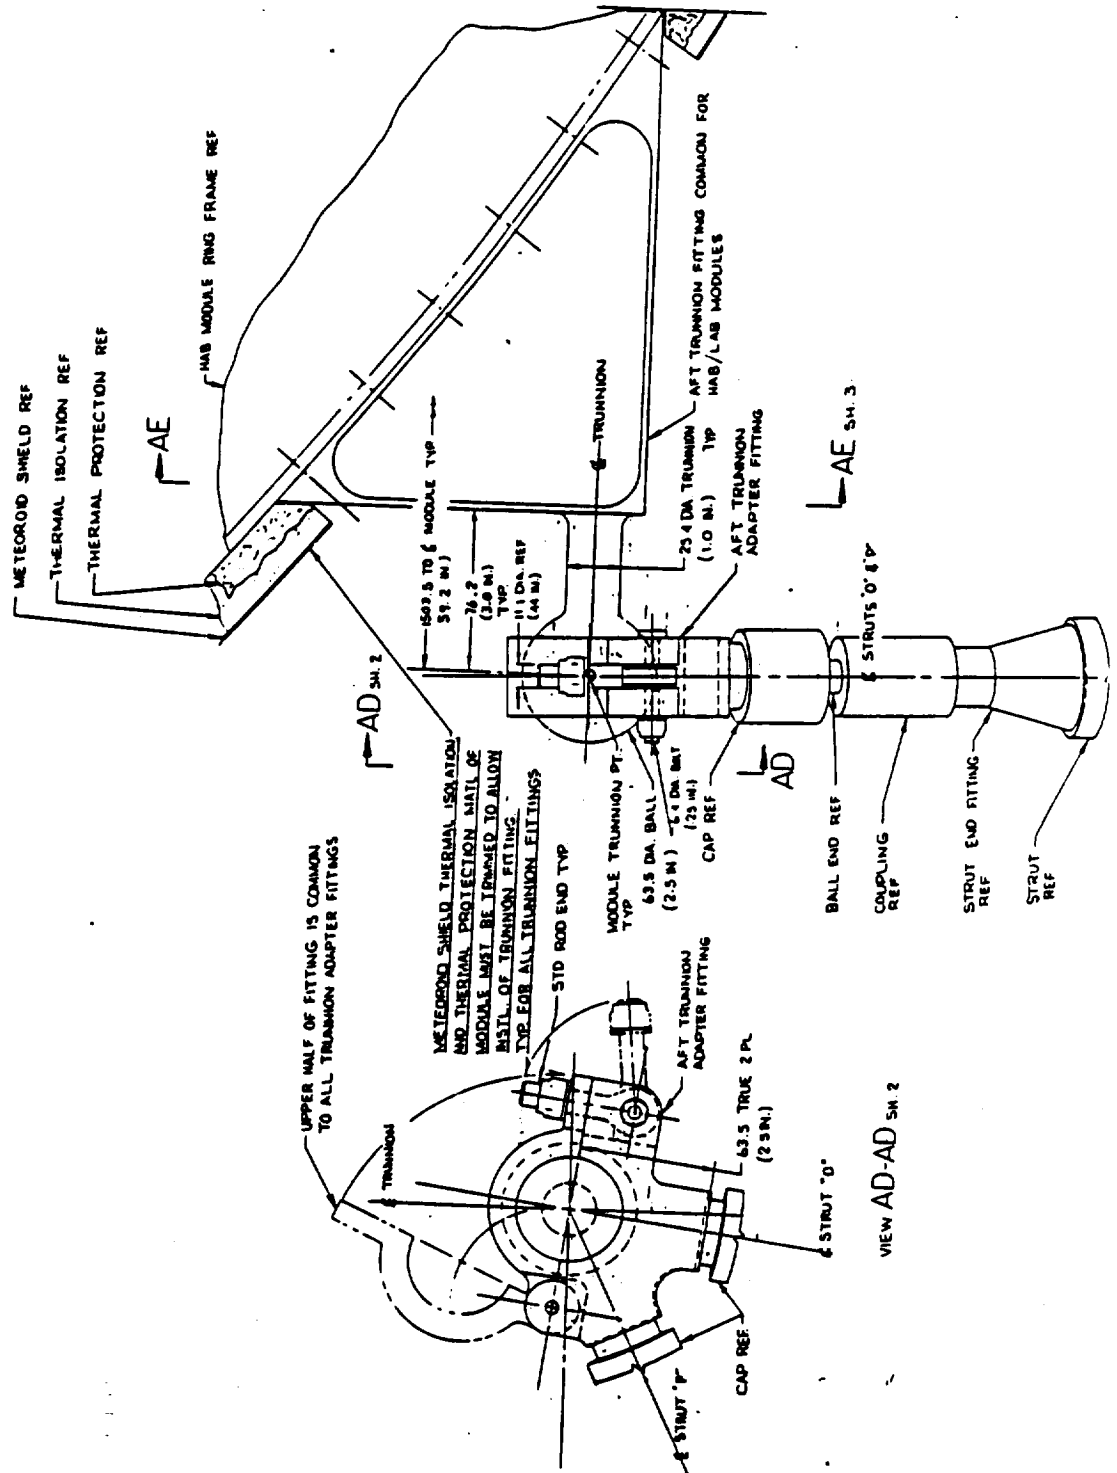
Module Attachment Fitting Preliminary Design
